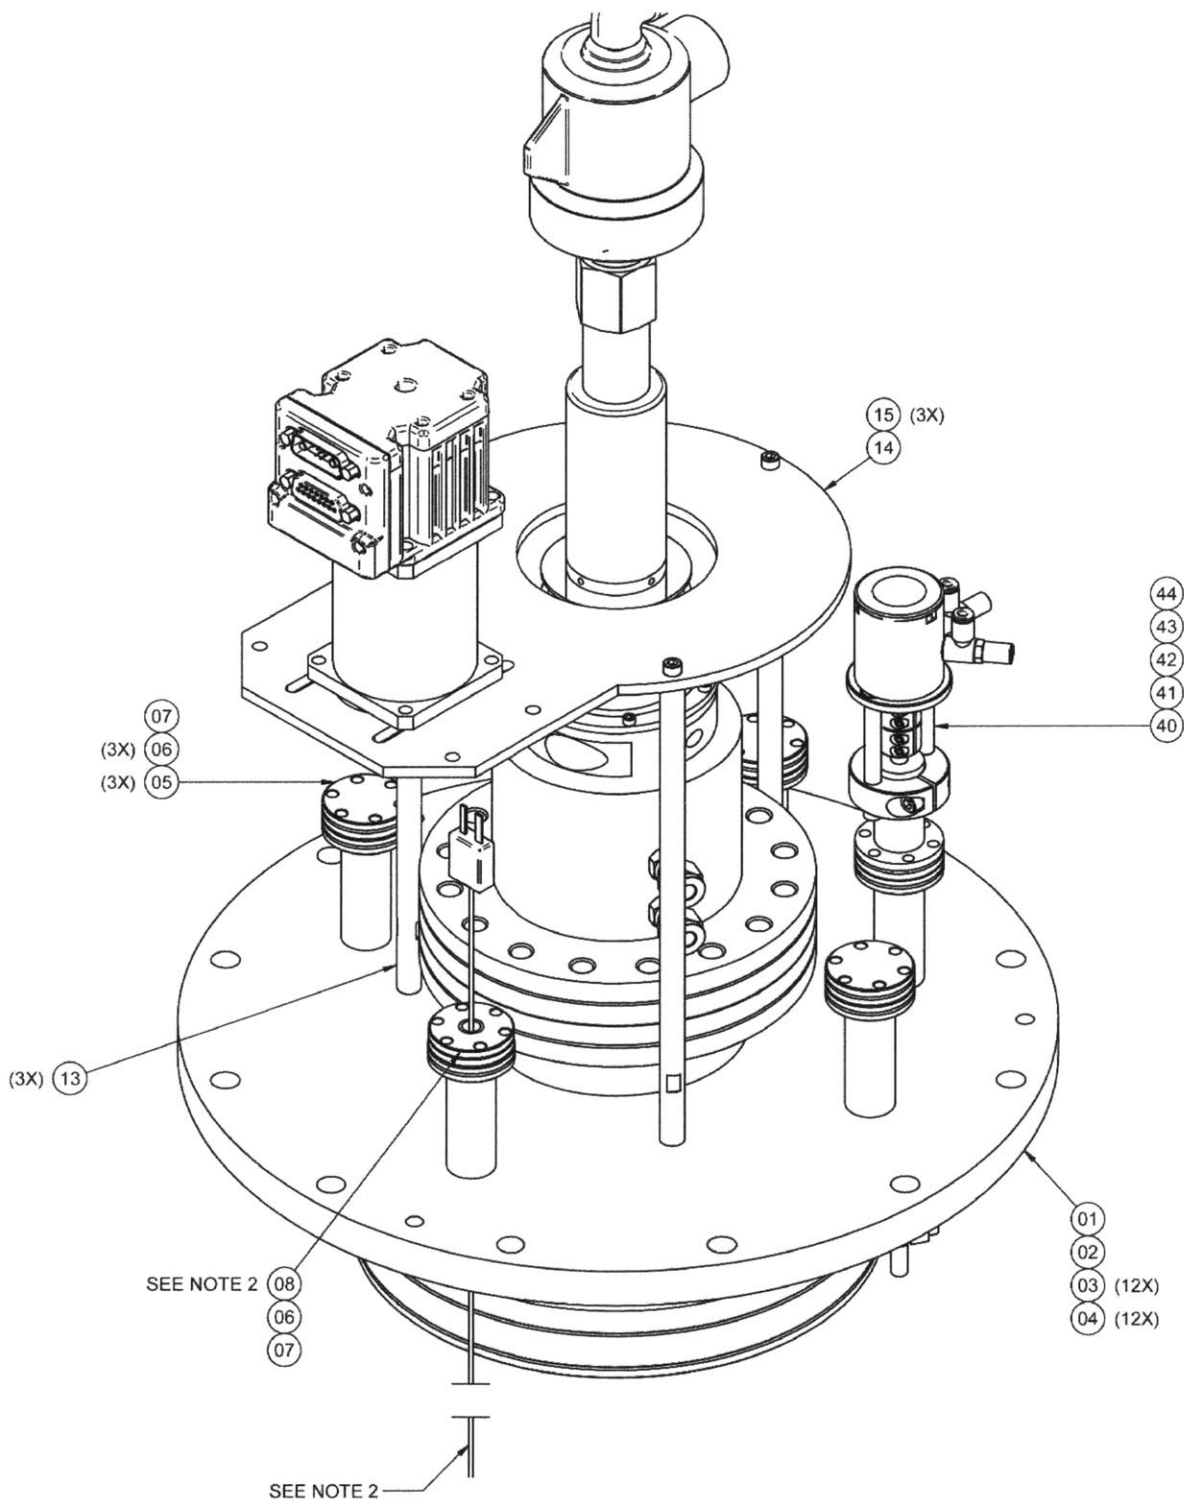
Engineering drawing of top flange for oCVD reactor for rotating stage.
